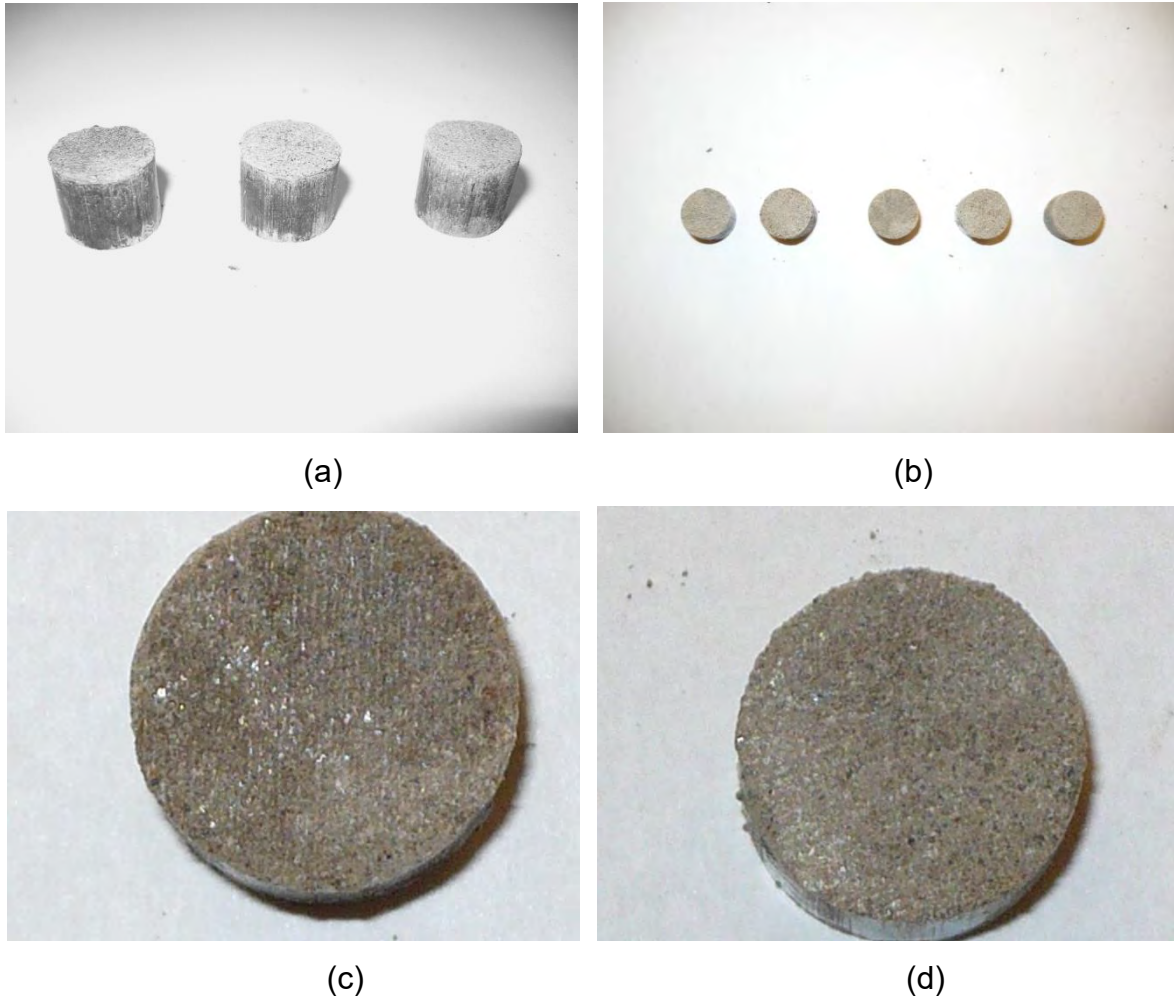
(a), (b), (c), (d) Compacted parts obtained by pressing
